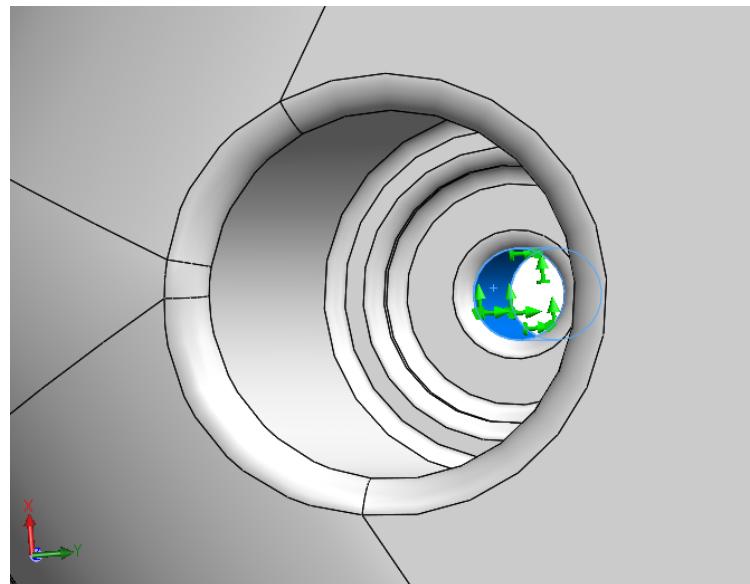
Holes for the screws where the fixed geometry fixture is applied.
